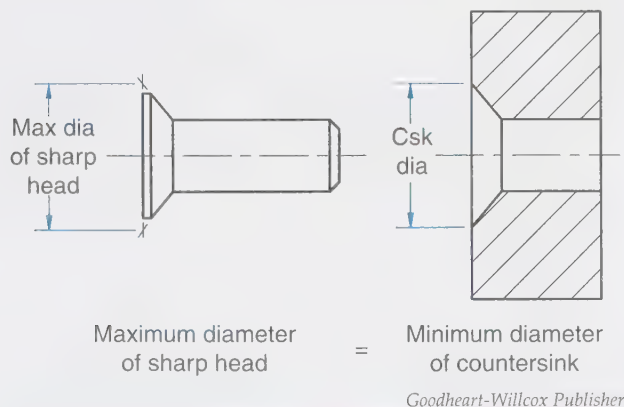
A countersink is used to recess a flat head machine screw or bolt head. A small countersink may also be used as a chamfer on a hole.
